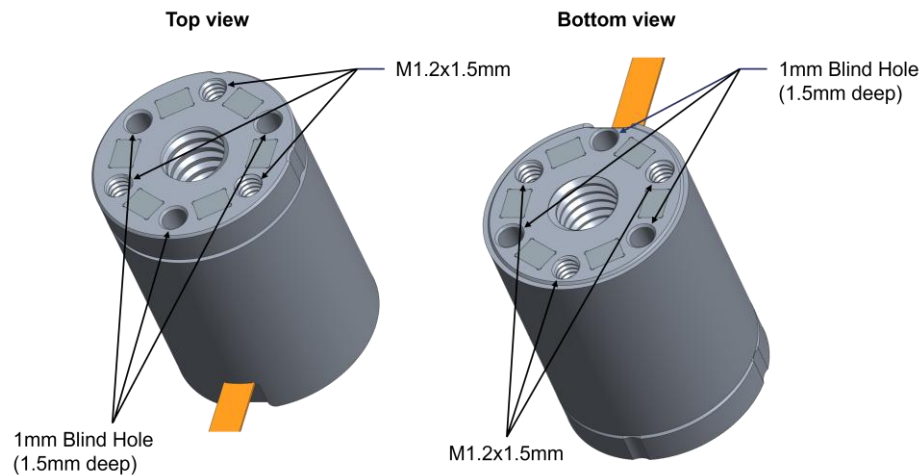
Top and bottom view of F/T sensor incl. screw and blind holes (example HEX8)
